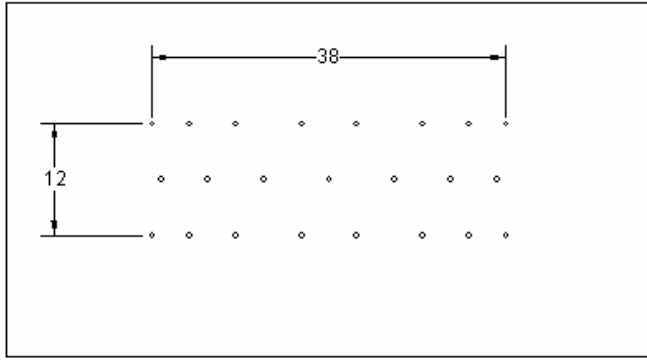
A drawing of the pinhole pattern for the 23-pinhole aperture. The dimensions are in millimeters.
